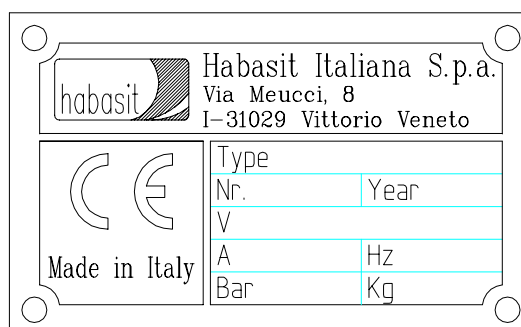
MACHINE IDENTIFICATION PLATE
